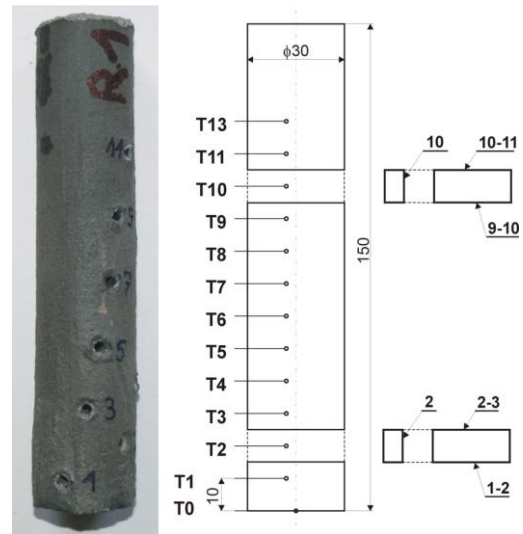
Drawing and marking of samples to metallographic investigations from model casting
